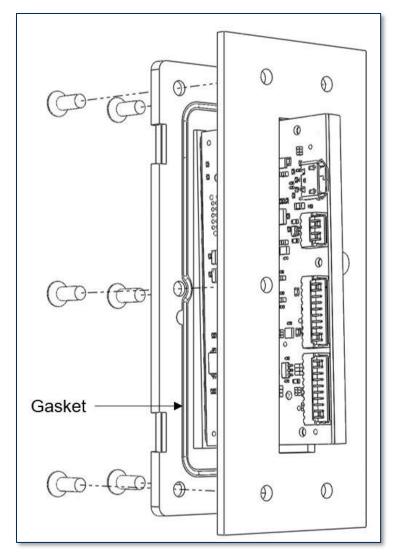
mDynamo Weatherized Mounting: Back View
